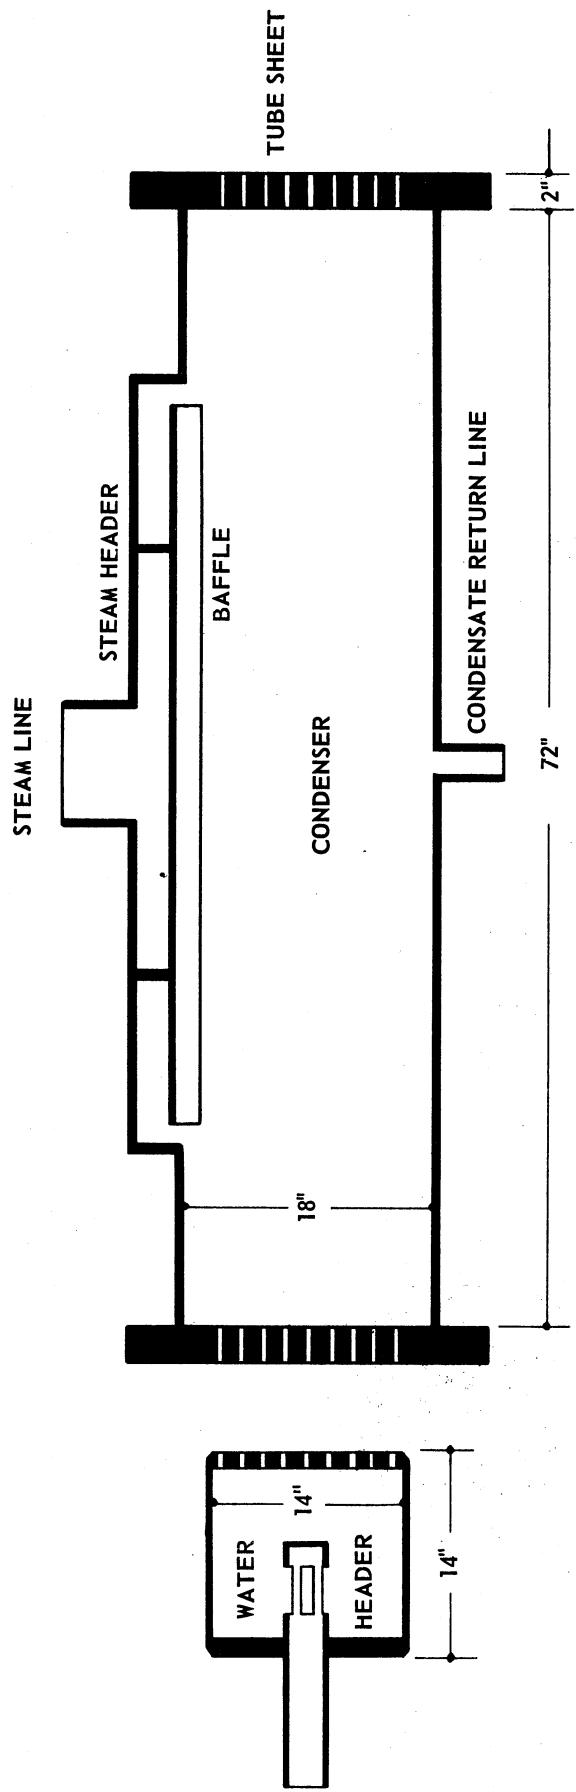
Cross-Sectional Drawing of Condenser and Inlet Water Header
